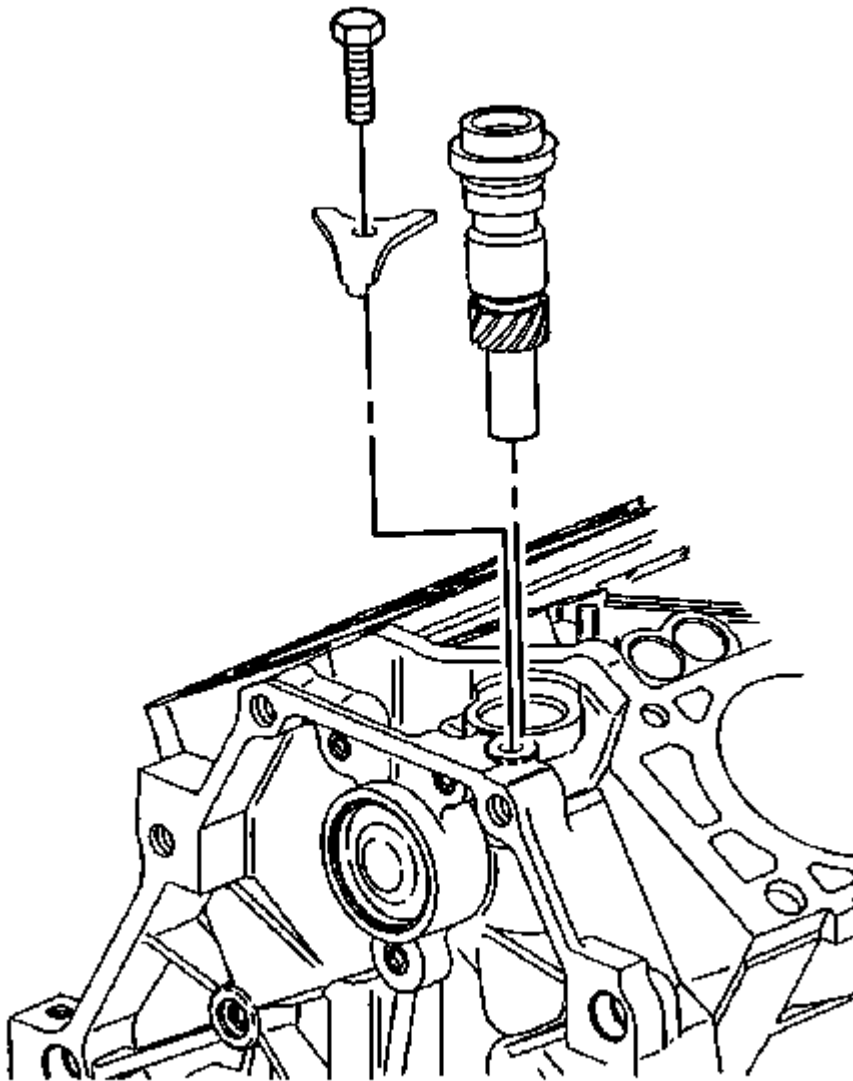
View Of Oil Pump, Drive Bolt, & Clamp
